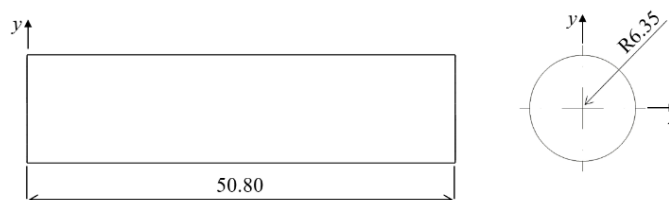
Test specimen for compression tests (dimensions in mm).
